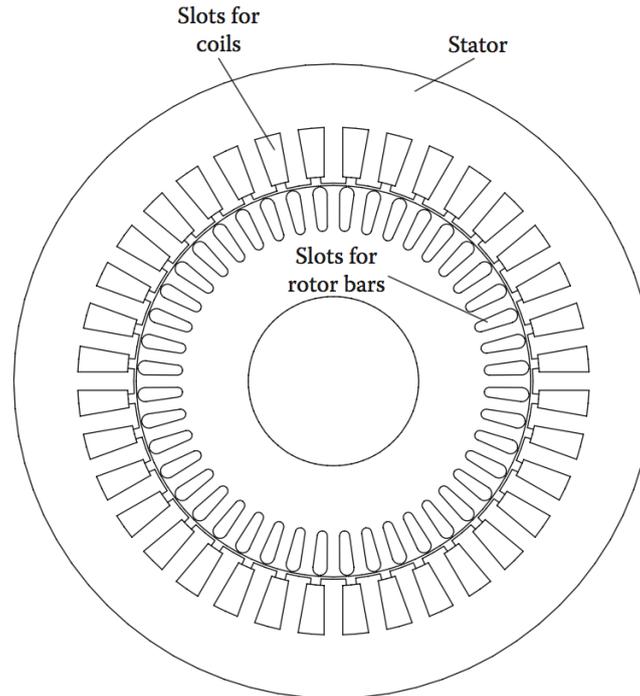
Cross-section view of a squirrel-cage induction machine. (Emadi, 2014)
